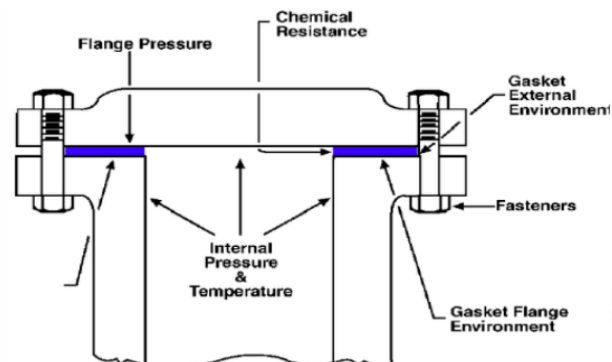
EXAMPLE OF A GASKET USED TO SEAL TO FLANGES [55]
